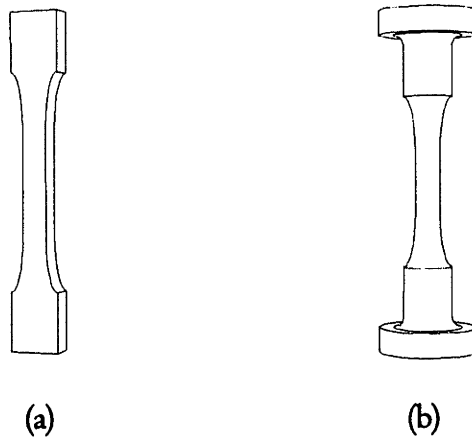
Specimen shapes for direct tensile testing. (a) "Dog bone" shape. (b) Cylindrical "buttonhead" shape.
